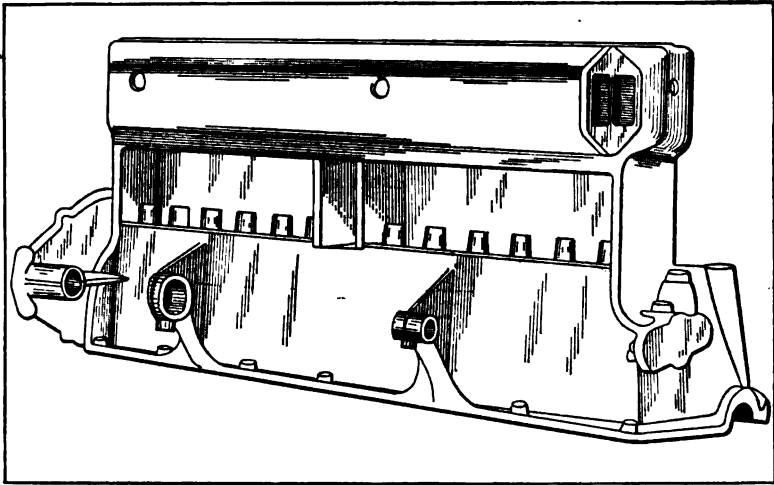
Block casting of Everitt "Six," a modern innovation in motor design because six cylinders, upper part of crankcase and inlet and exhaust manifolds are included in one casting.
